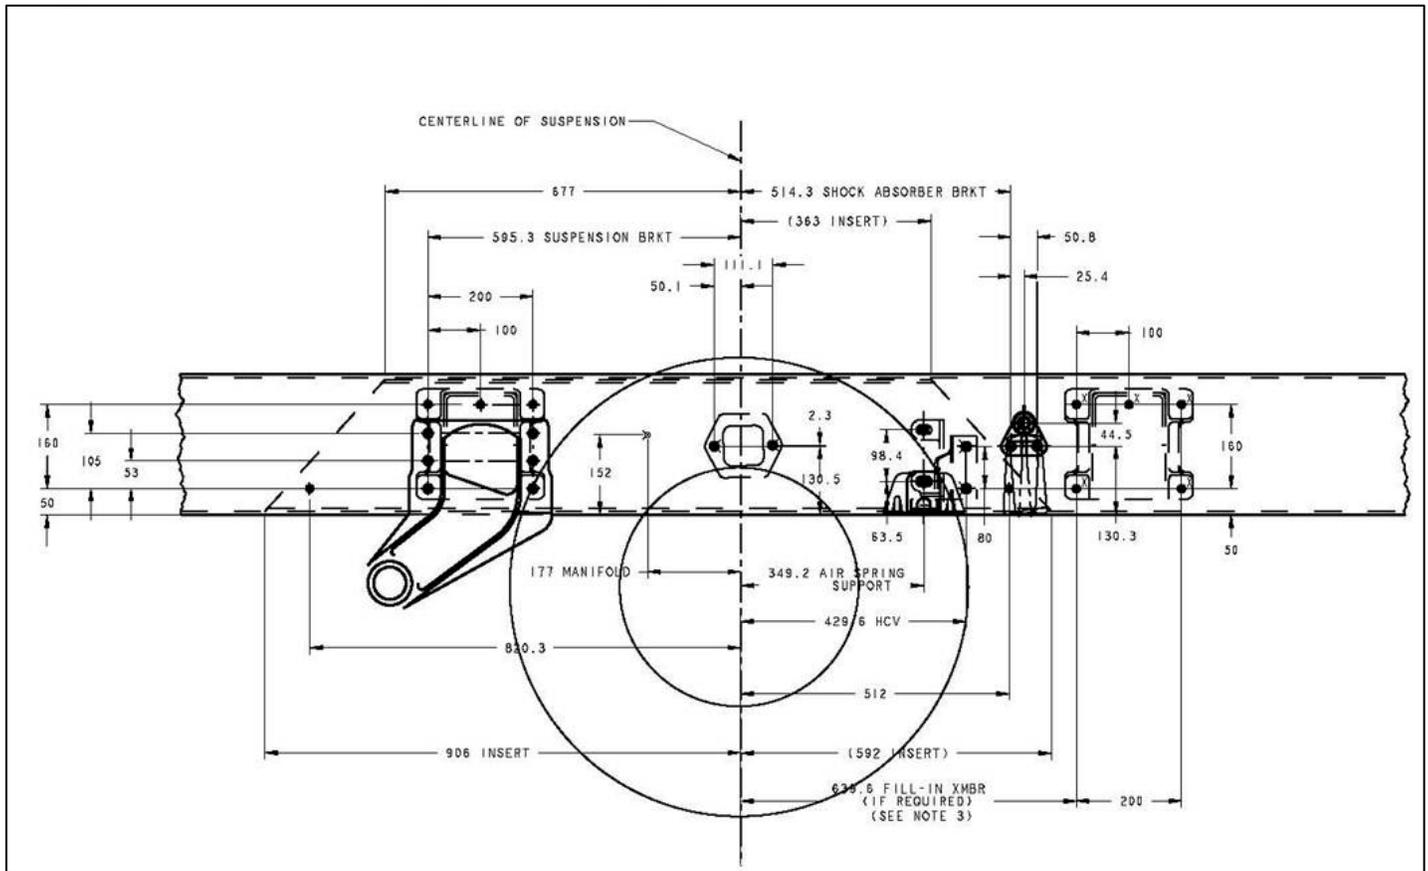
Reycor 102AR Frame Drilling (Dimensions In Millimeters)
